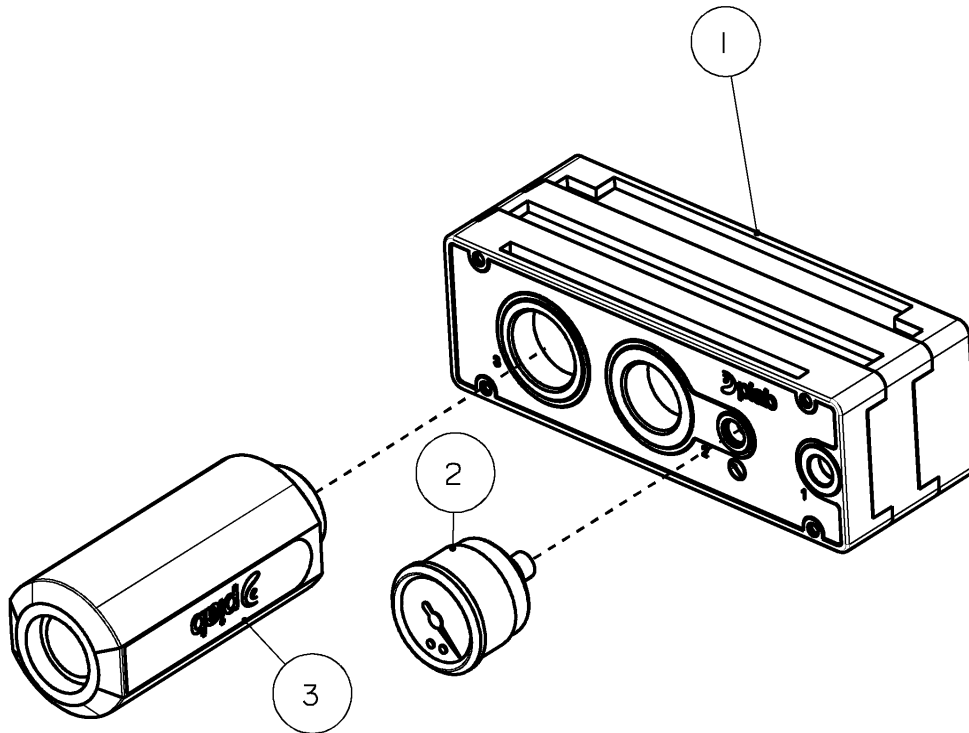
DIMENSIONS : VACUUM SYSTEM
